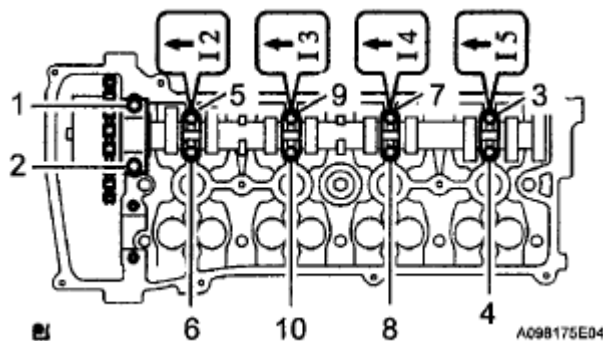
Identifying Bearing Caps Bolts In Sequence
